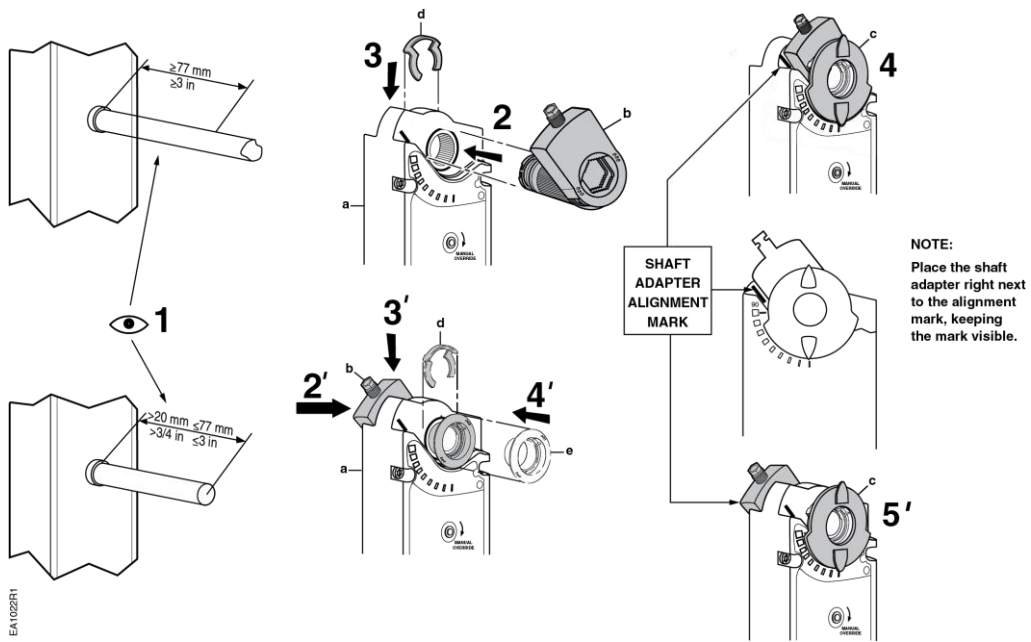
Shaft Length and Proper Shaft Adapter Location.
